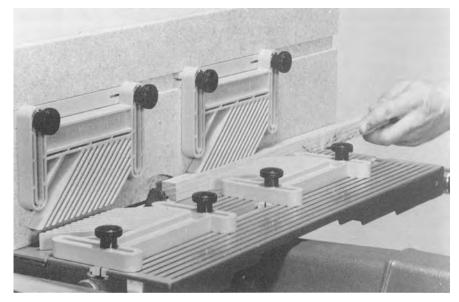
Work this way when you need many similar pieces of slim molding.
